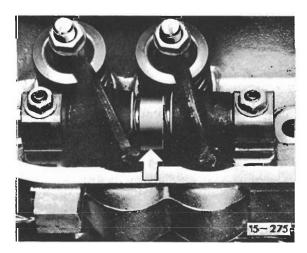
Rocker arms, showing locknuts and adjusting screws at top. Arrow indicates spacer bushing that was introduced in 1978 along with hydraulic valve lifters.
